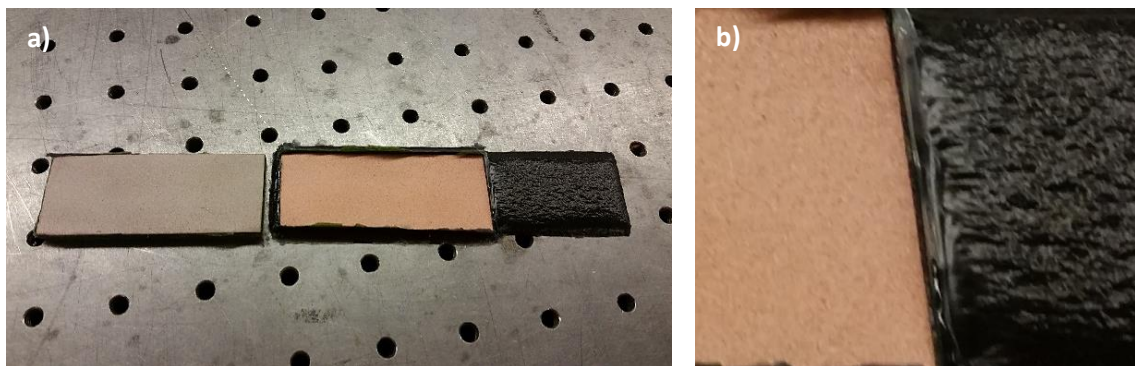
RL 1.3: Image of: a) demoulded sample and mould, b) magnified copper coated CFRC showing undamaged edge of the coating.
